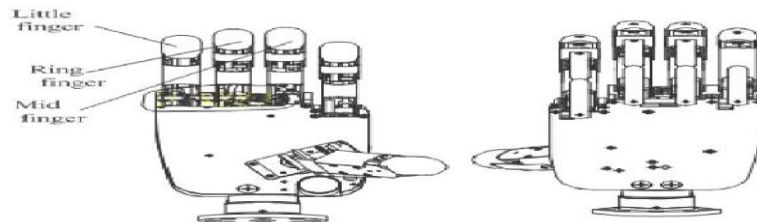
FIVE FINGURE HAND WITH UNDER ACTUATED MECHANISM 2D DRAWING [31]
